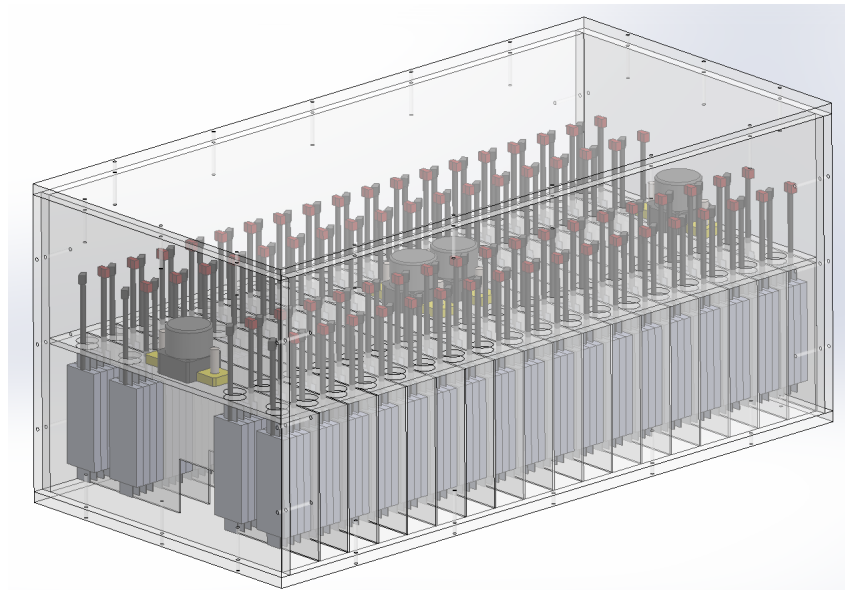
CAD rendered image of the fully constructed battery pack with all slider packages and contactors.
